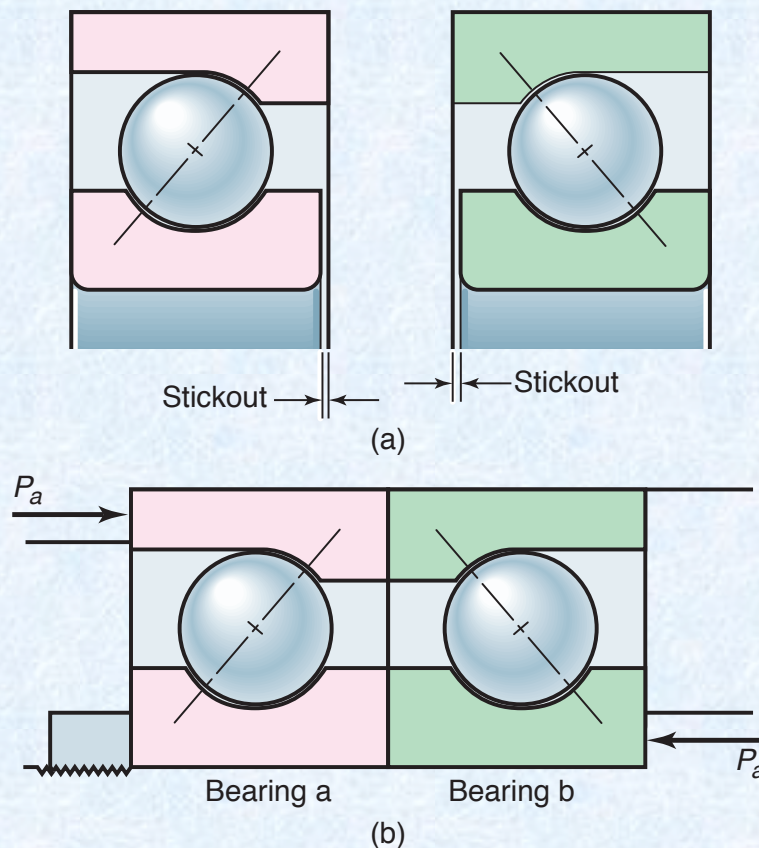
Angular contact bearings in back-to-back arrangement, shown (a) individually as manufactured and (b) as mounted with preload.
